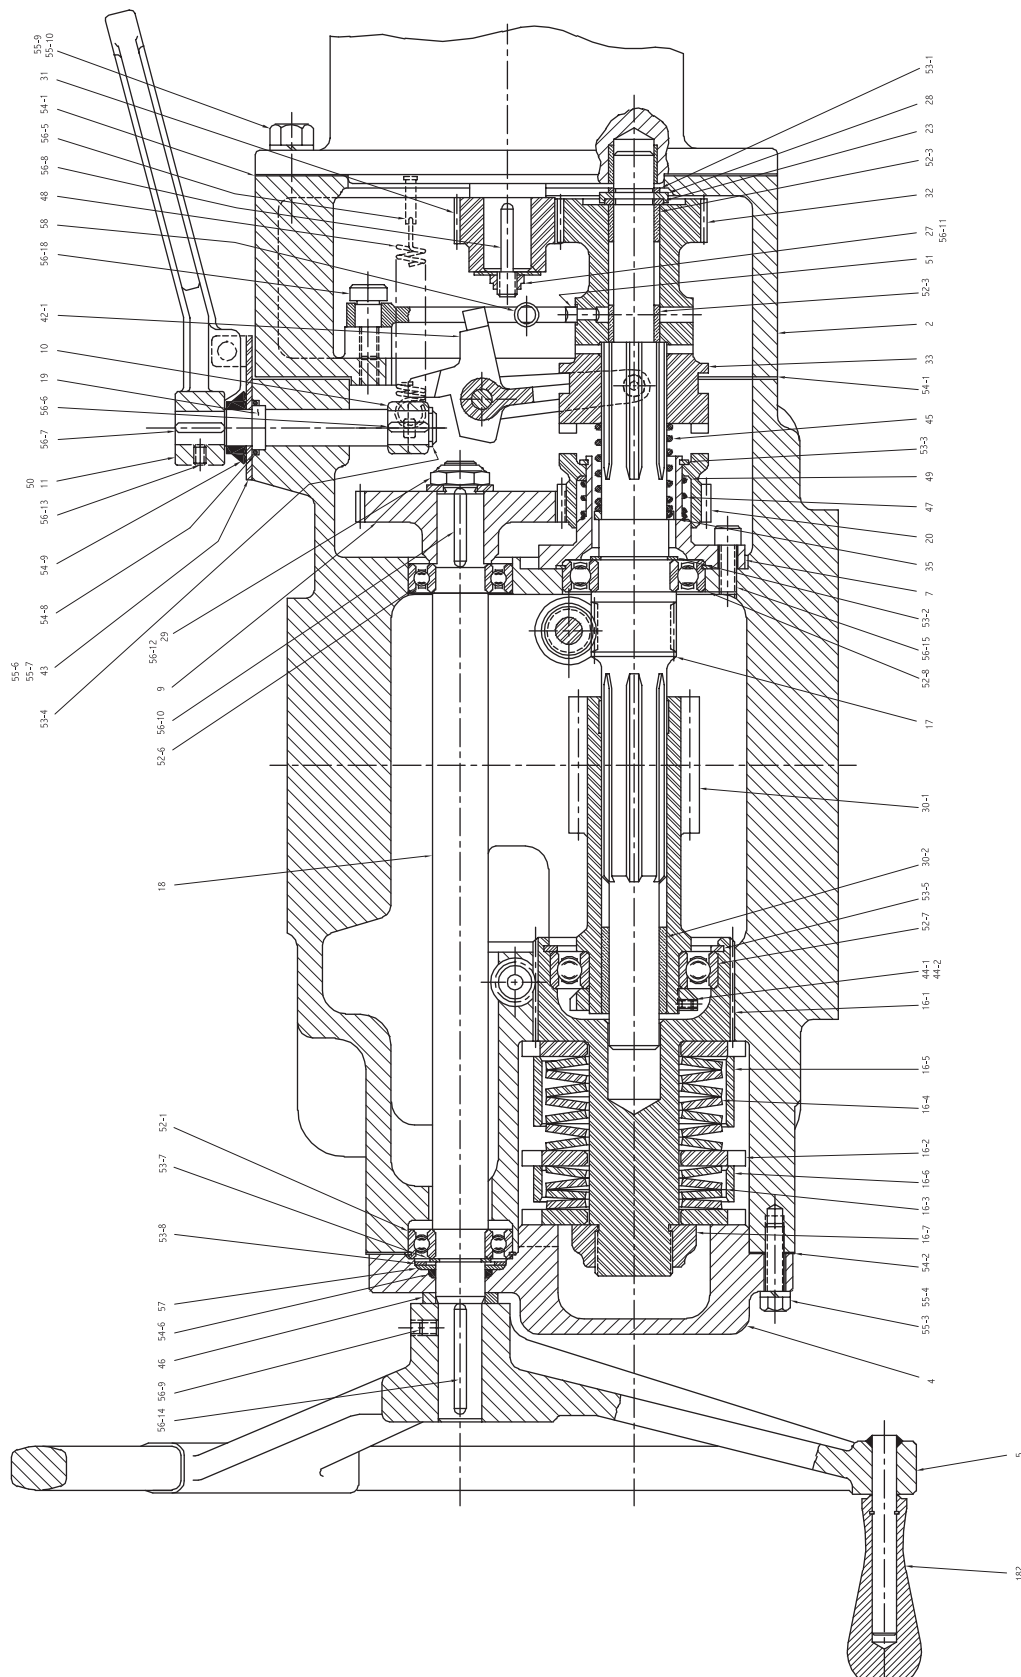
L120-190 and -420 (Refer to Table 8.1 for parts list)
